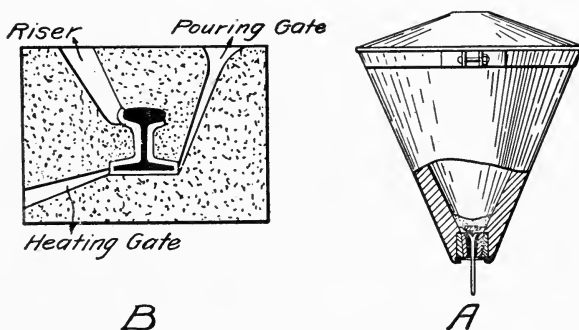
Moulds Crucible. Thermit Welding.
